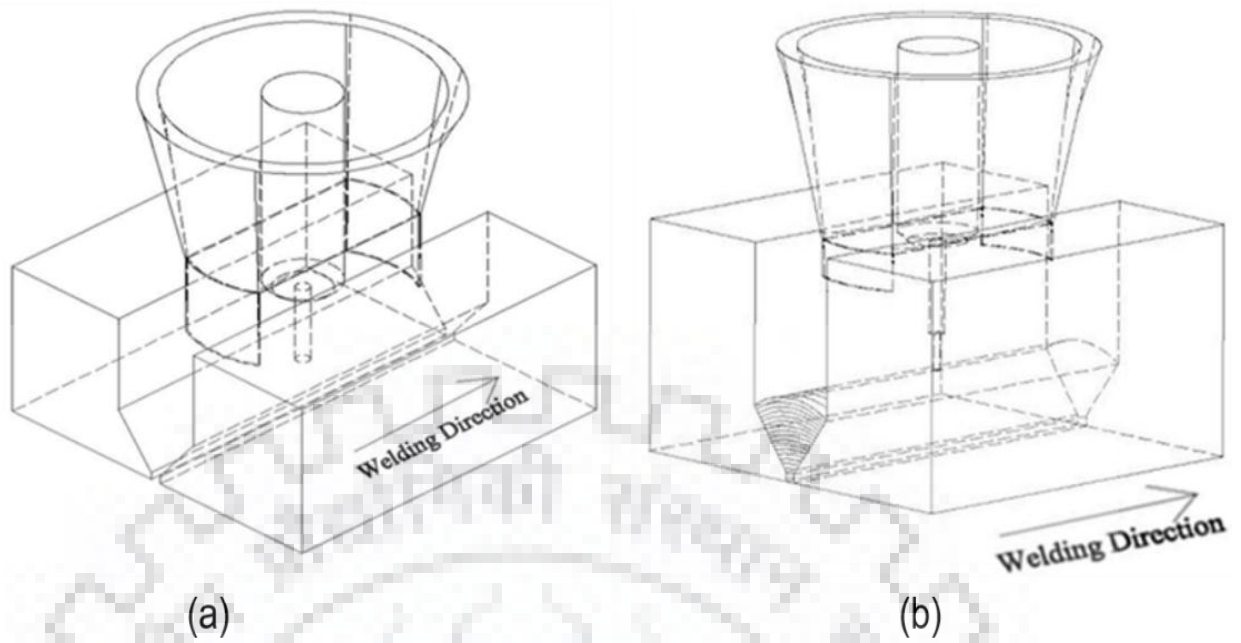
Isometric drawing of rectangular faced narrow gap GMA welding torch nozzle used in (a) first pass and (b) second pass.
